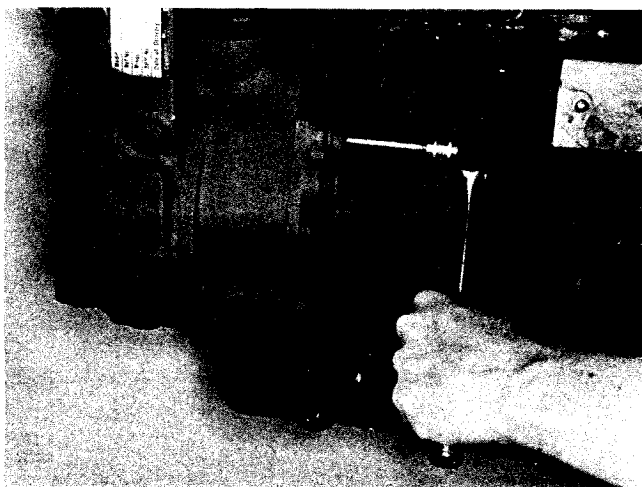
, (N100104). Removing lubricating oil pump (NTA Series)
